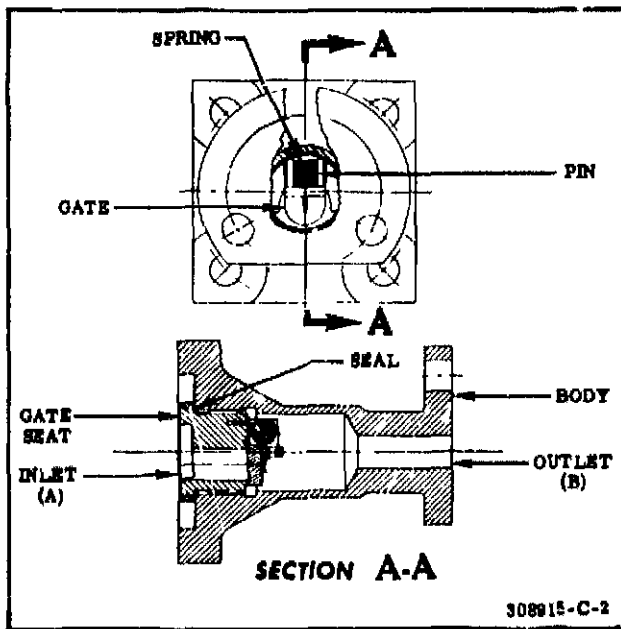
Gas Generator Oxidizer Purge Check Valve--Cutaway View
